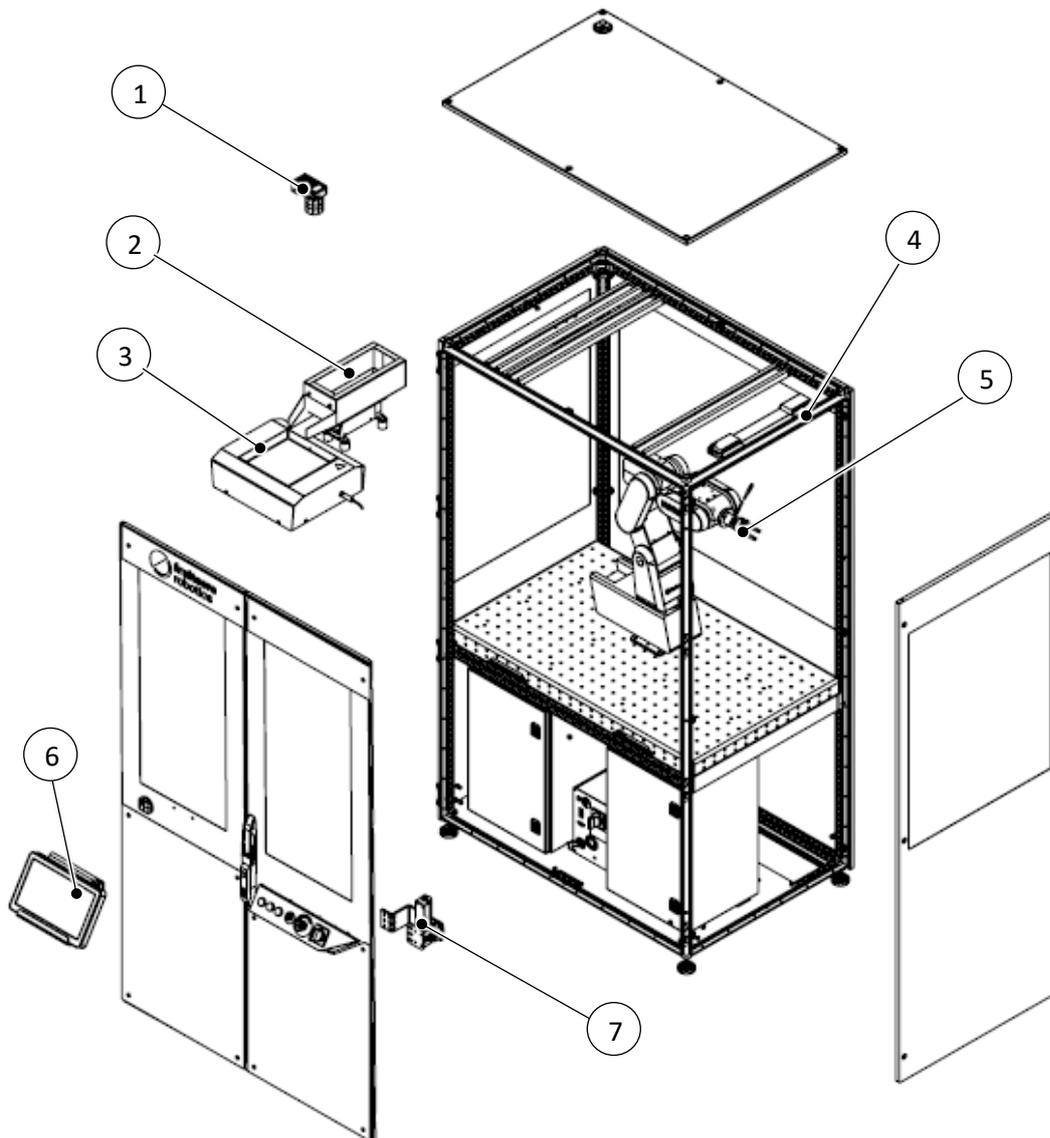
Solution Kit Part Separation - vue éclatée
